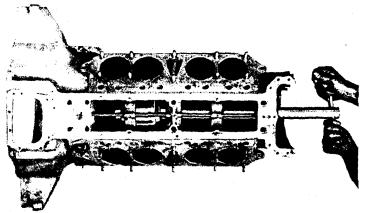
Removing Camshaft Bearing with Puller 72407
